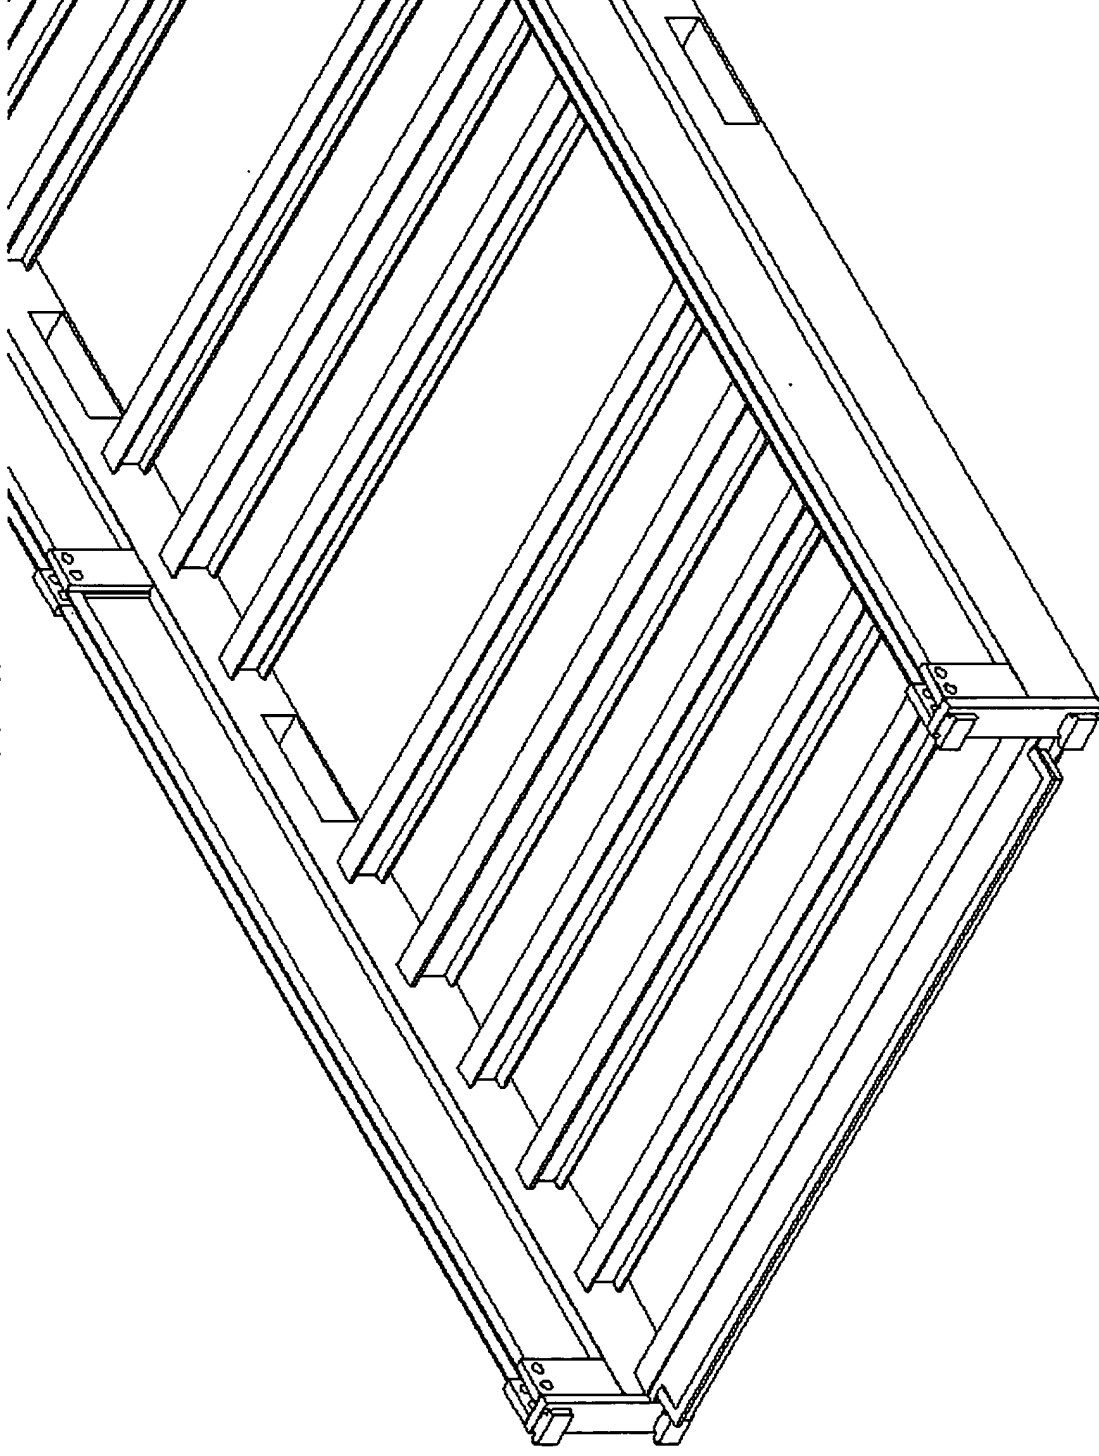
D: Isometric view of the right end of a floor frame (20 foot high cube collapsible cargo container)
